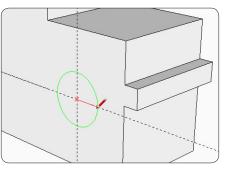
The Circle Tool placed over the intersection, ready to begin drawing the hole.
